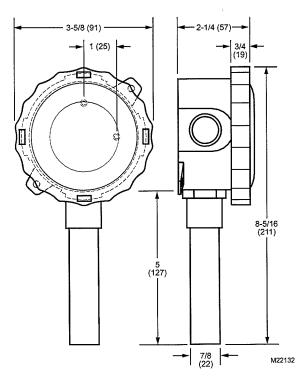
C7031G, C7021F, C7023F, C7041F dimensions in in. (mm).
